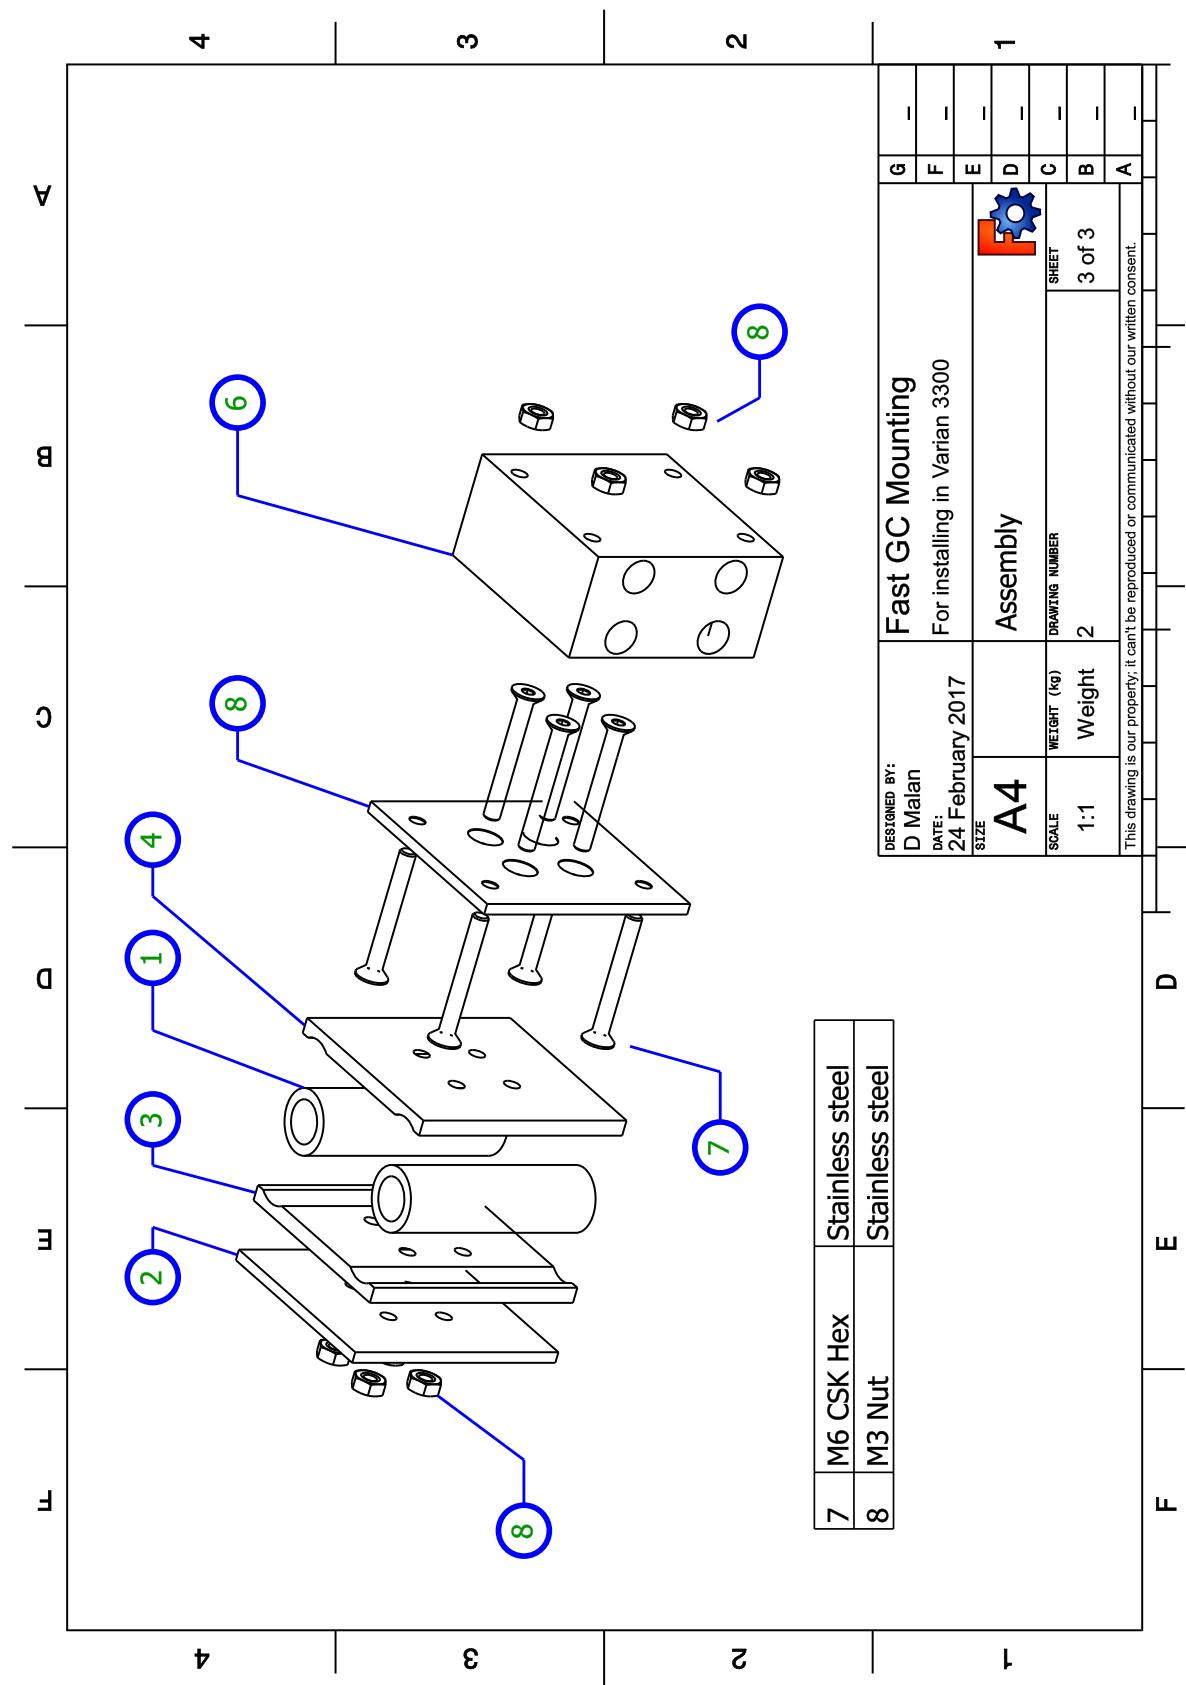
A technical drawing of the T-piece block mounting.
